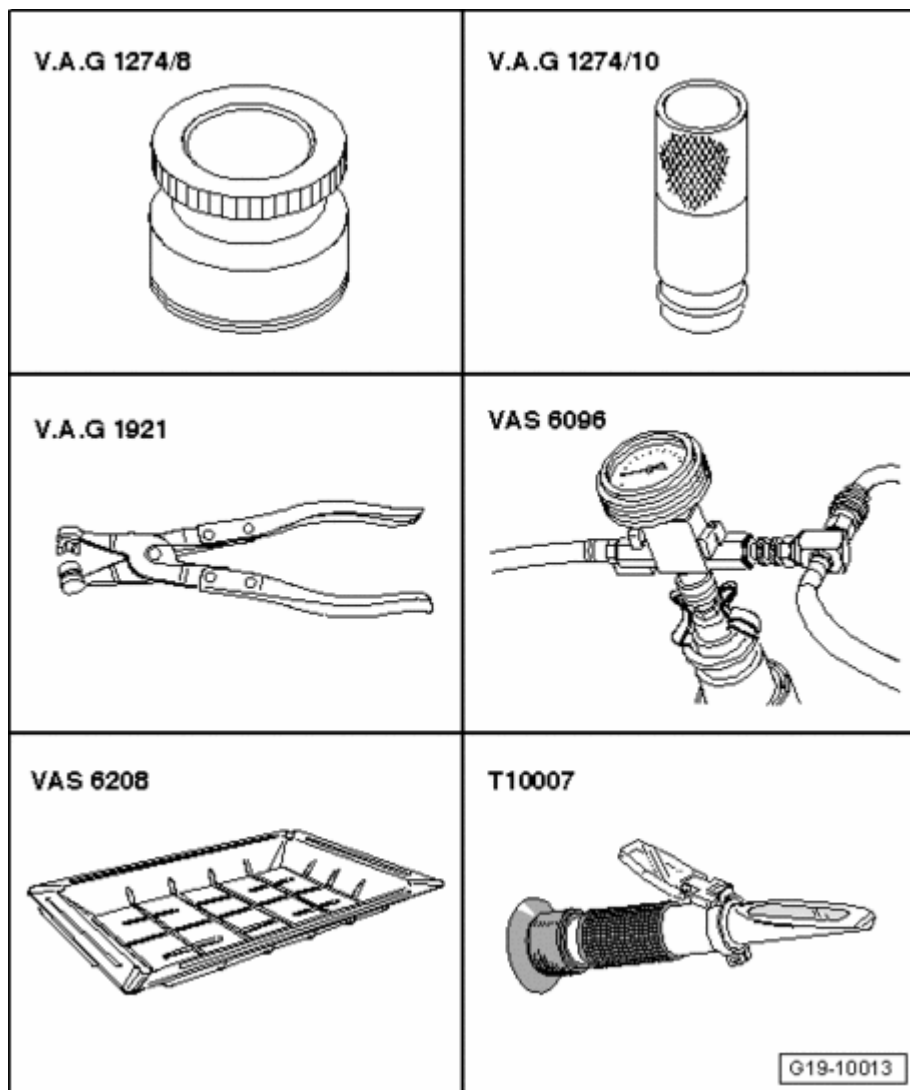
Identifying Special Tools - Cooling System, Draining And Filling
